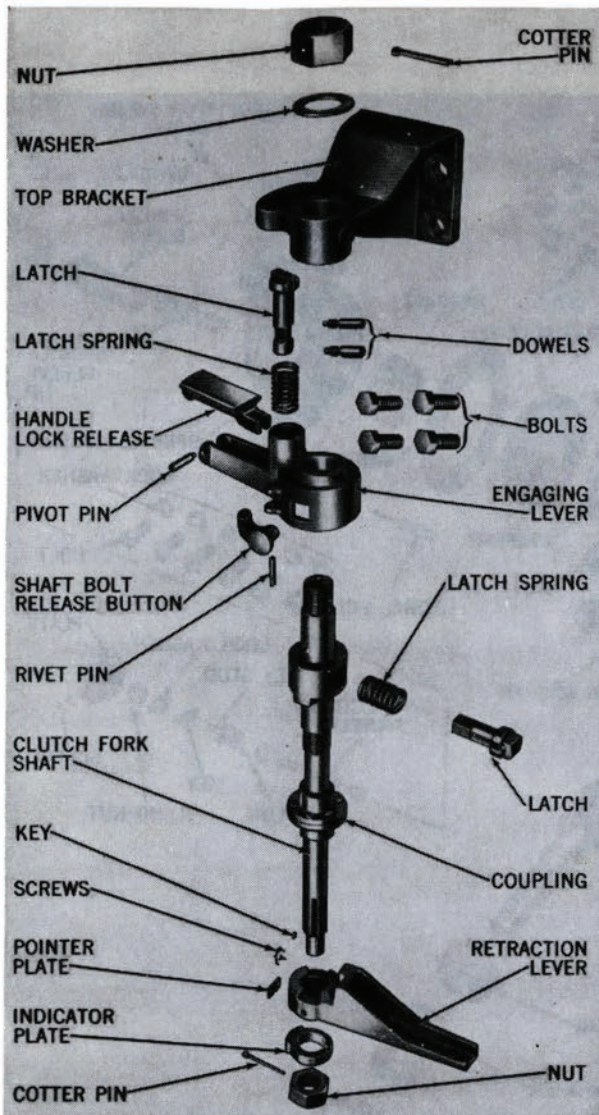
Gyro Setting Mechanism Tube Unit Disassembled.
